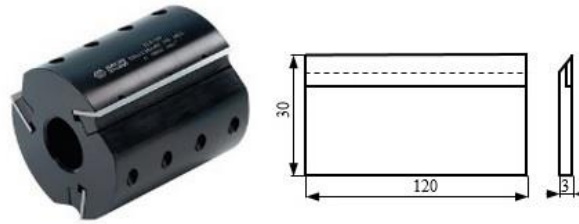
Assembled cutter head with insert knives and TC cutting edges, type K20.
